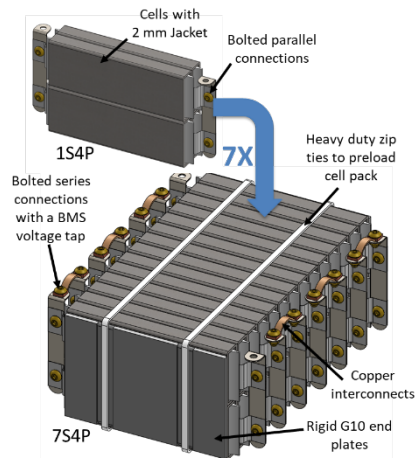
26 V, 20 Ah battery pack equipped with the packaging technology
